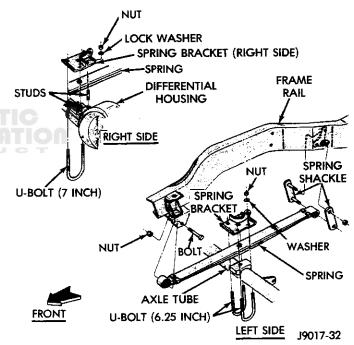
Front Suspension W/Model 44 Axle-W-150, W-250, W-350 & AW-150 Vehicles
